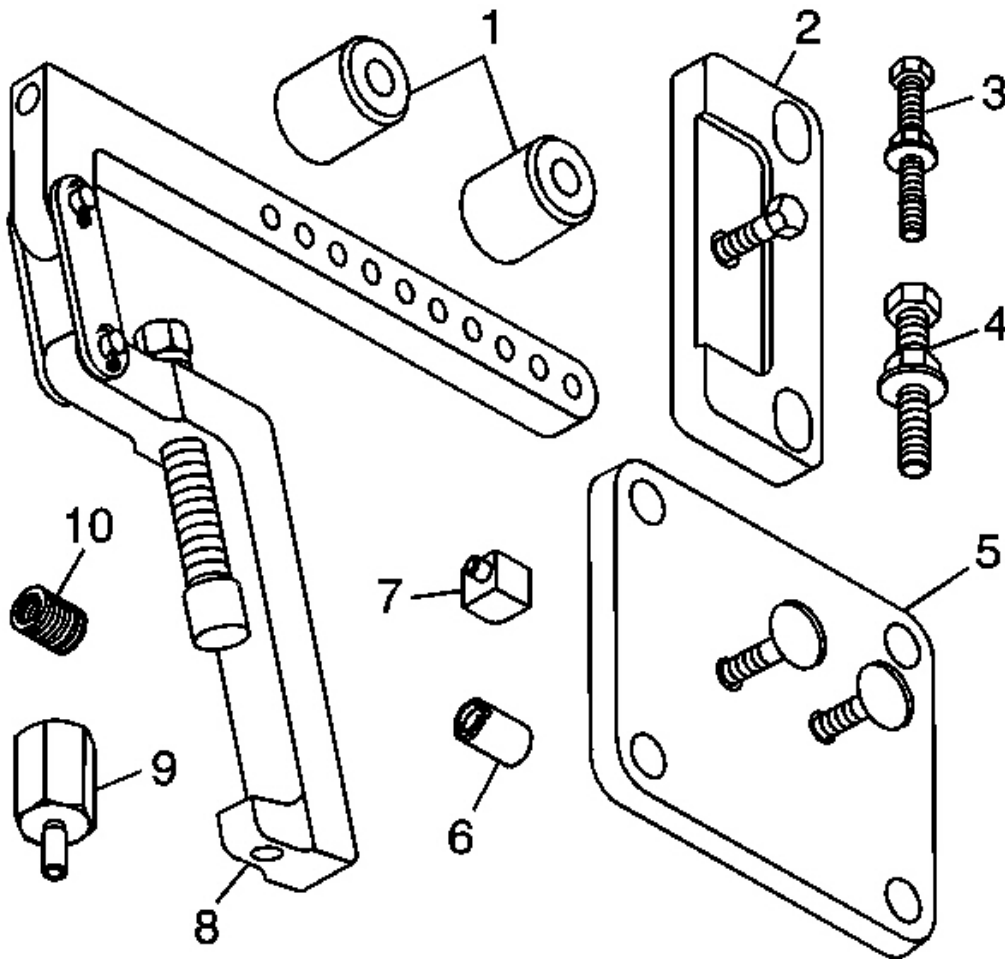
Identifying Rod Bearing Clearance Tool - Adapter Kit
